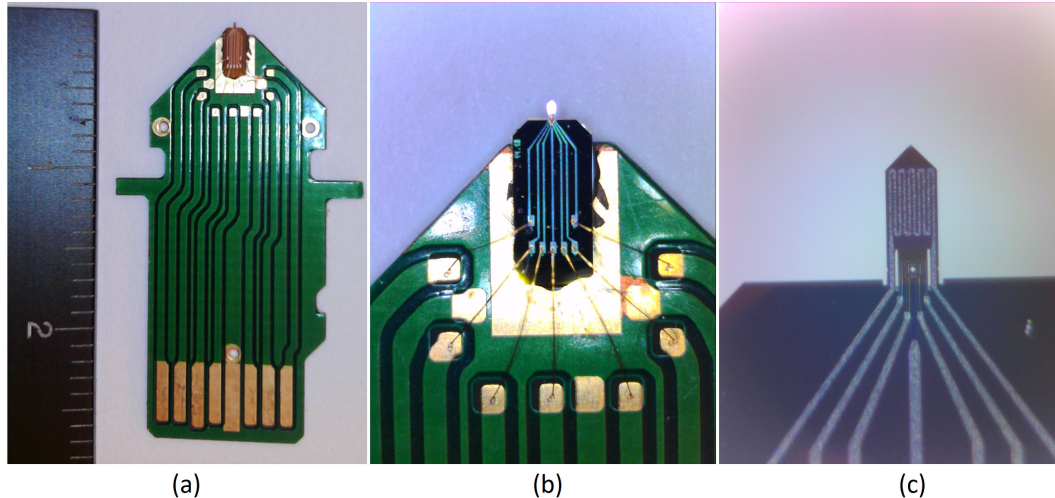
Optical microscope image of the fabricated active cantilever probe: (a) SD card shape PCB with ruler reference (label unit: cm), (b) lead wire bonding between the PCB and the PCB, (c) active cantilever with piezoresistive sensor at base, serpentine shape aluminum heater and electrical wiring
